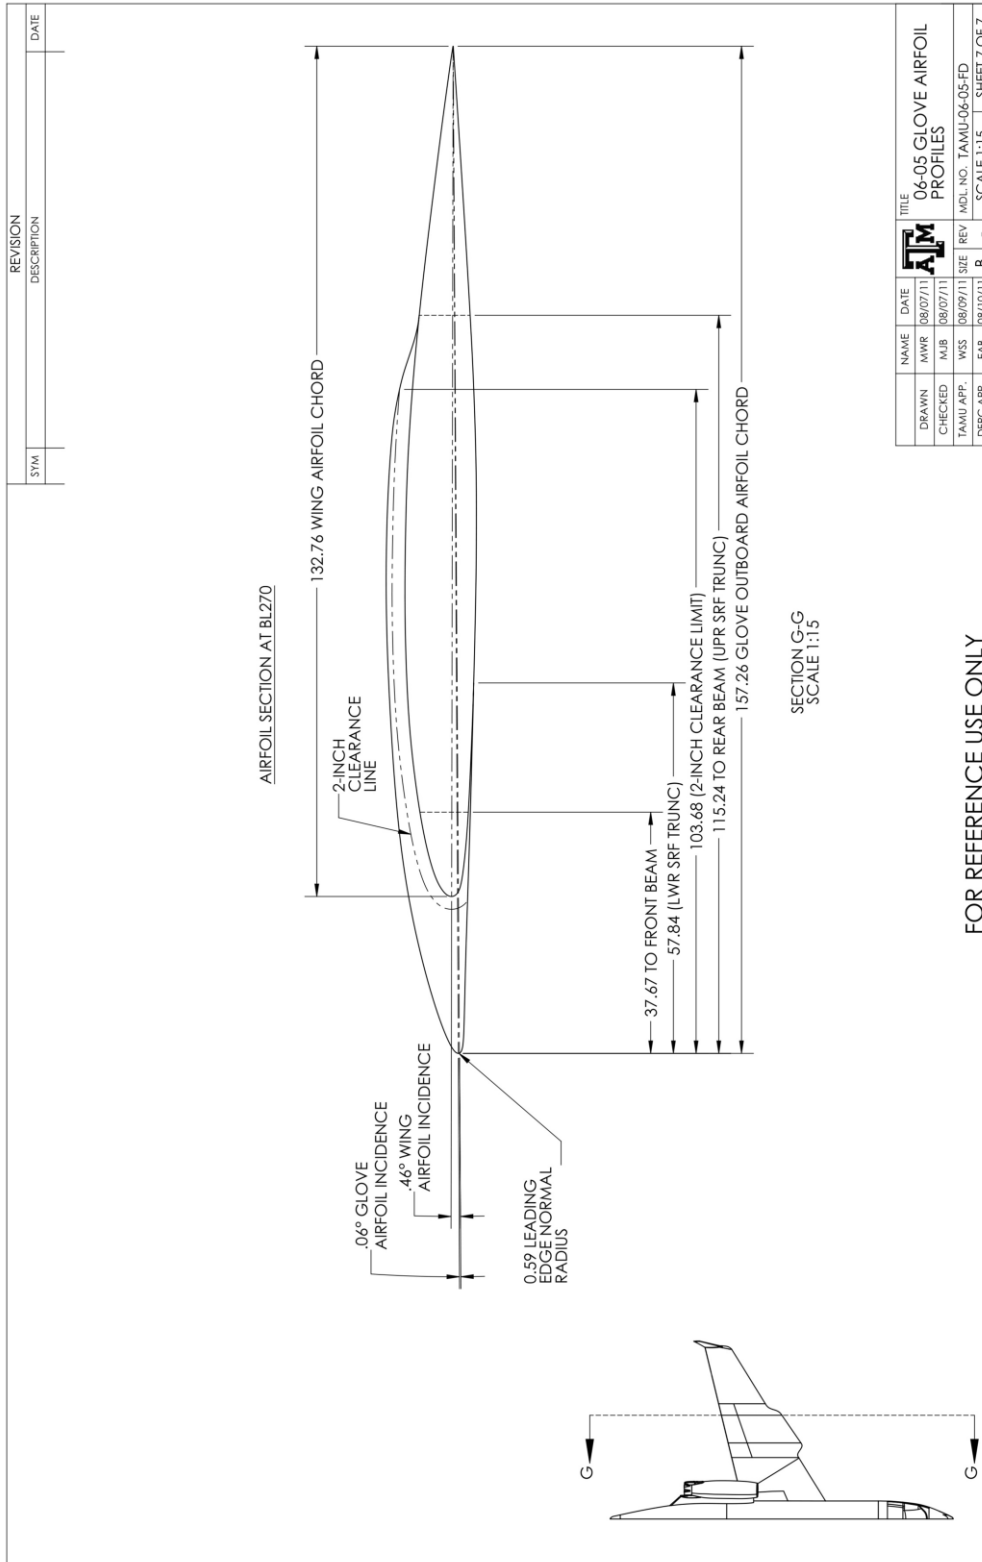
Sheet 7 of the 06-05 Glove Airfoil Profiles drawing: airfoil section at BL270.
